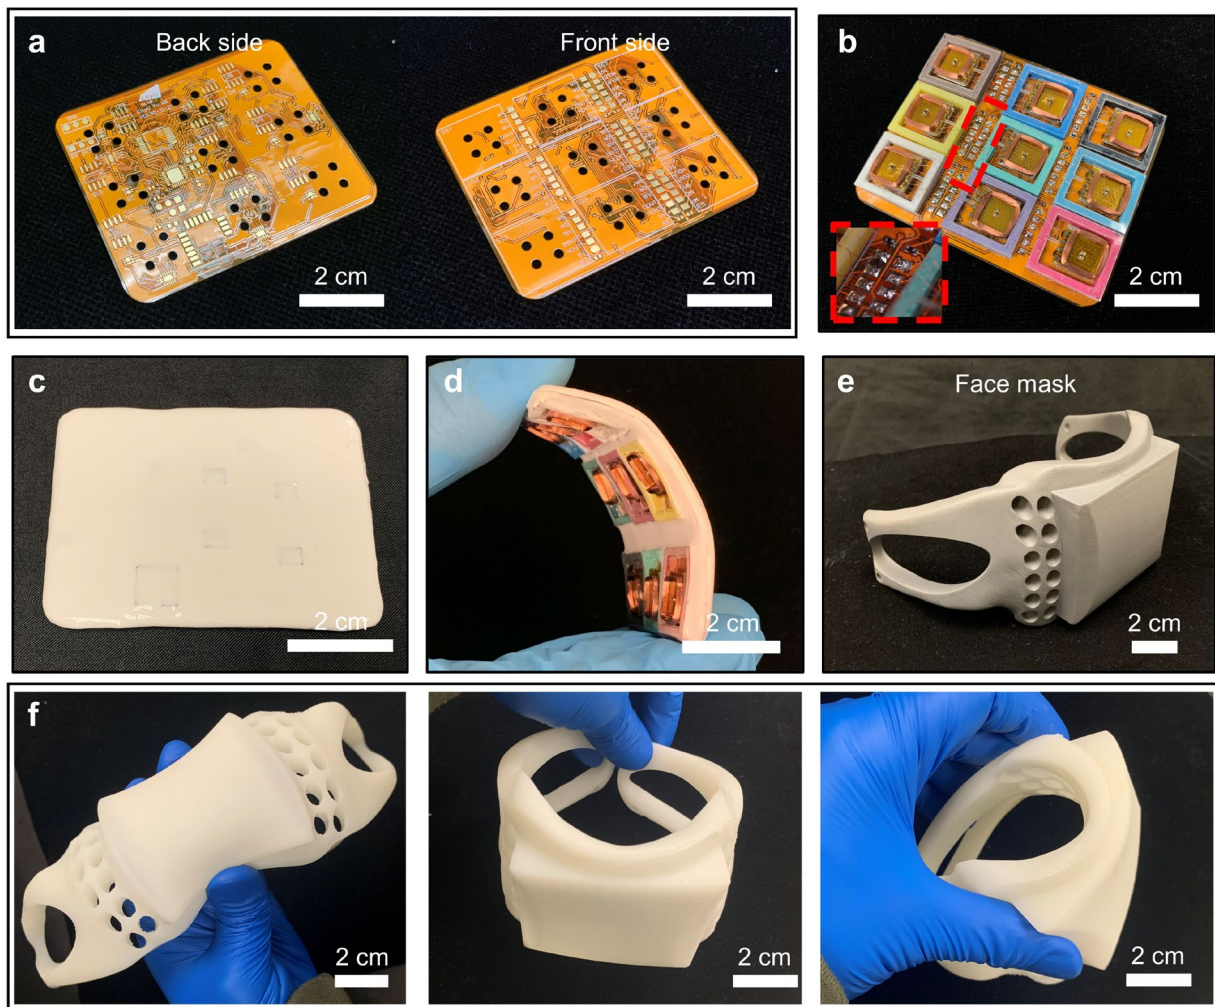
Illustrations of the device 2 based on 9 OGs. Optical images of the back and front side views of the FPCB (a), 9 OGs soldered onto the FPCB with enlarged details (b), the encapsulated back sides of the FPCB with electrical elements soldered (c), the encapsulated device based on 9 OGs bent at an angle of 30° (d), the self-designed face mask based on soft rubber (e), and the mask under three bending deformations (f).
